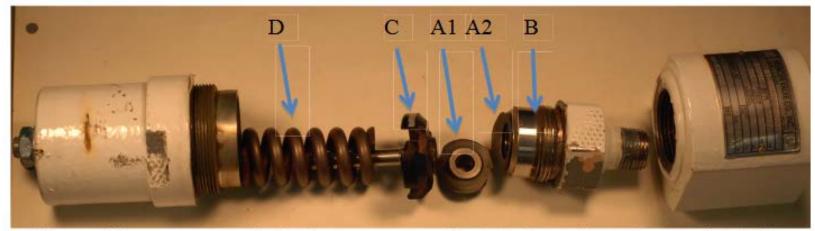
pressure relief valve components: failed nozzle subassembly (A1 and A2); inlet base (B); disk subassembly (C); set spring (D).
